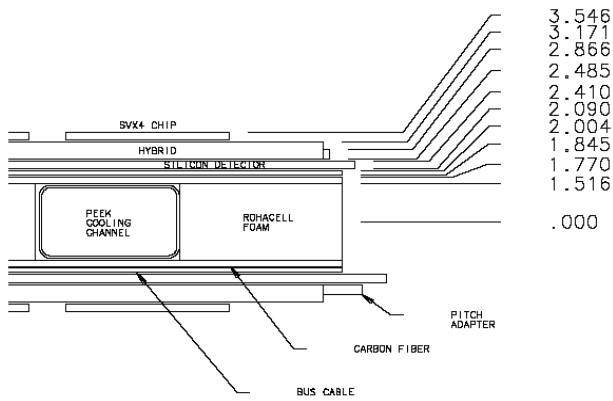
End view of stave. Dimensions are in millimeters. The total thickness of the stave is 7.092 mm.
